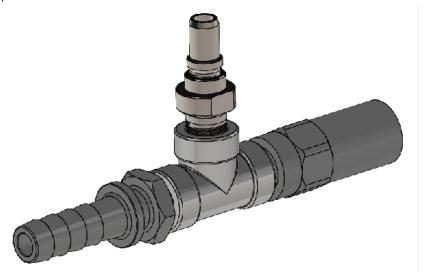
EXHAUST HOSE CONNECTOR ASSEMBLY – A001150 (FOR ILLUSTRATION PURPOSES ONLY)
